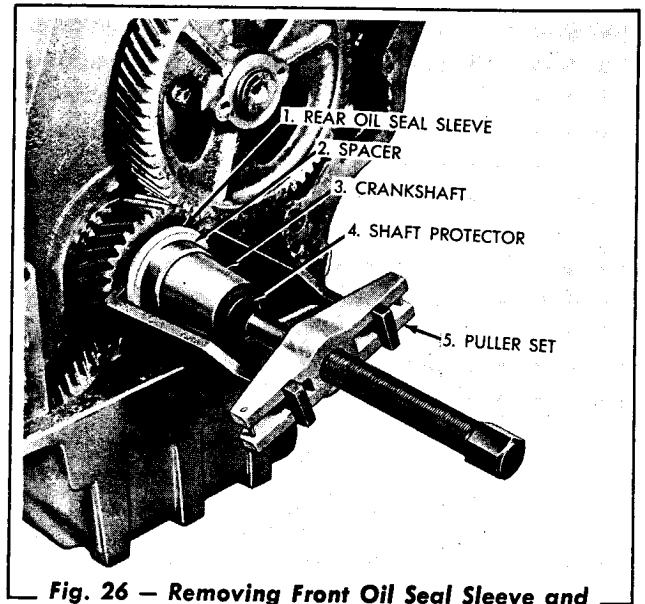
Removing Front Oil Seal Sleeve and Sleeve Spacer from Crankshaft
